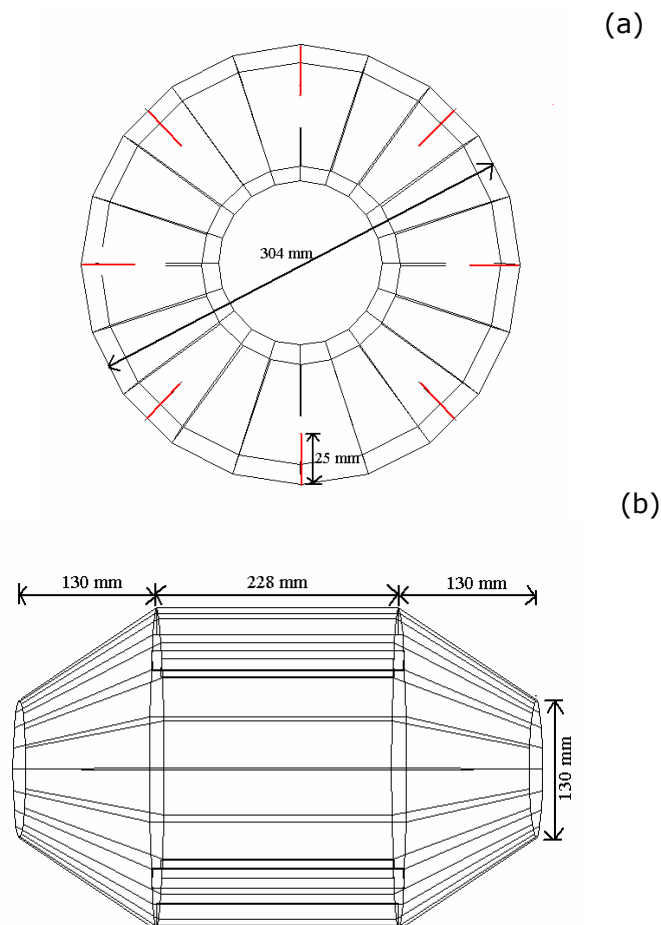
(a) End View of the Drum and (b) Side view of the tumbling mill
